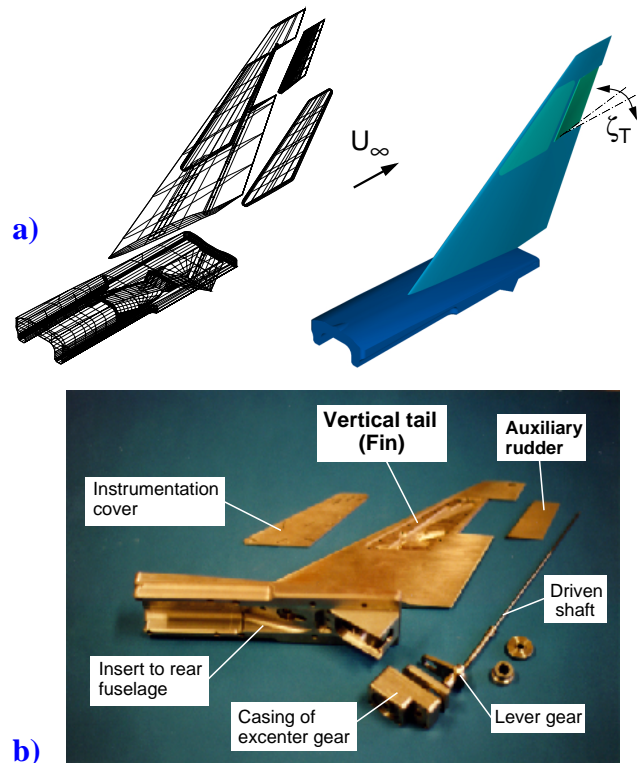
Fin section components. a) CAD models, b) assembly parts with driven auxiliary rudder.
